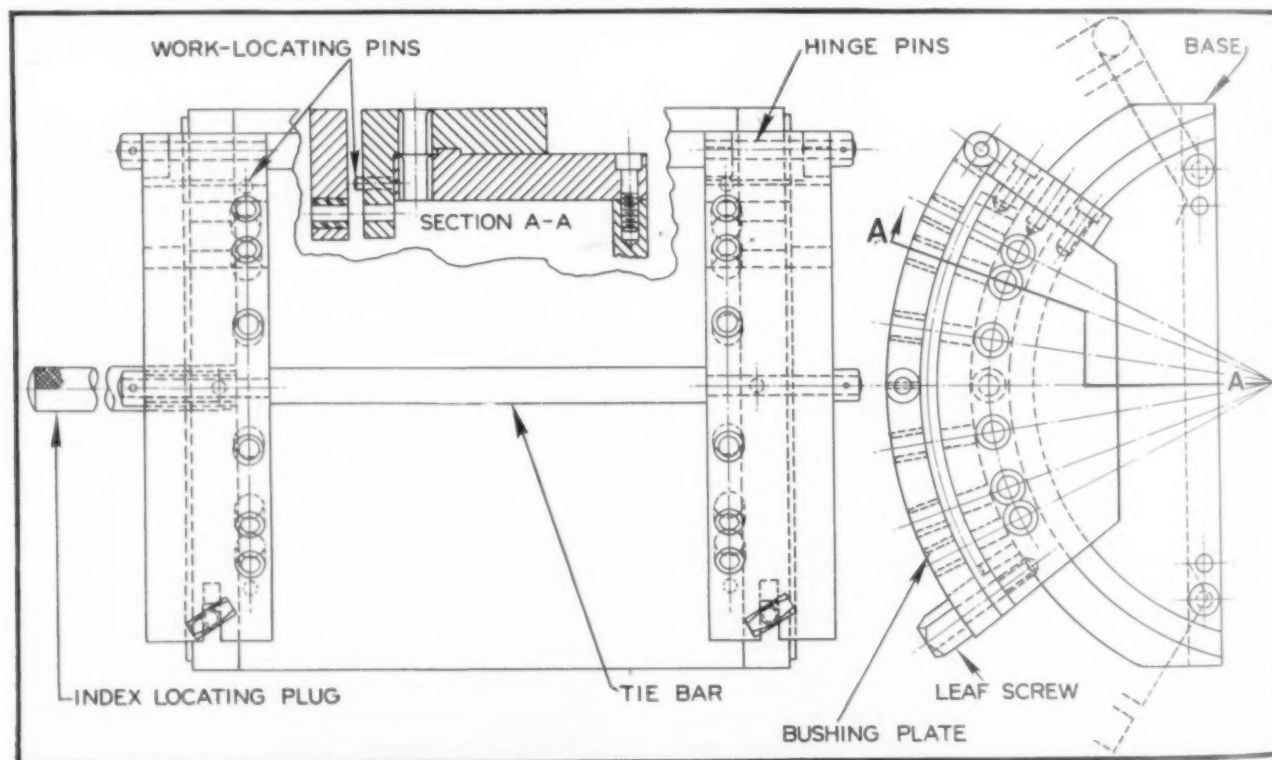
The drill jig. The base end members are machined from one casting, which is parted in a later operation to make two identical parts. A spacer plate joins the two members. The bushing plate—or leaf—is also machined in a lathe as are the two sliding members, the latter grooved sliding fit on the tongued base end pieces. Index holes, corresponding with the radial location of the drill bushings, provide for progressive indexing of the several holes.
